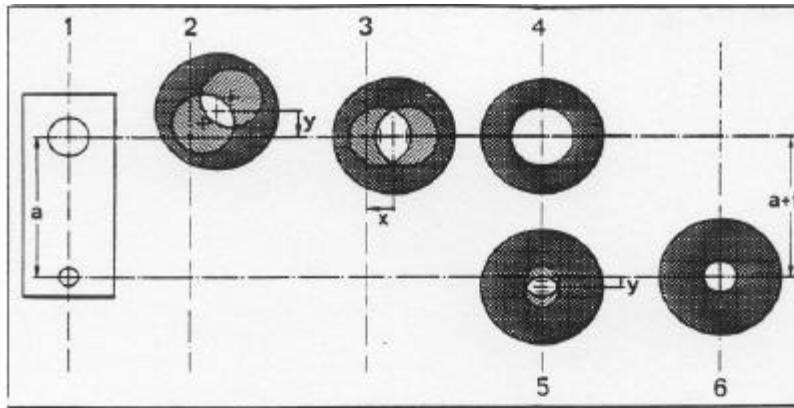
Measurement with double-image attachment. After aligning the workpiece (1), set the upper bore - via the possible intermediate positions 2 and 3 - as shown in position 4. Read the value on the reversible counter or reset at zero and move the testpiece via possible position 5 to 6. The second reading is then taken: the difference between the two represents the measured value. With this method there is no need to take note of the different diameters of the bores (a = specified dimension, f = error), after ¹⁵).
